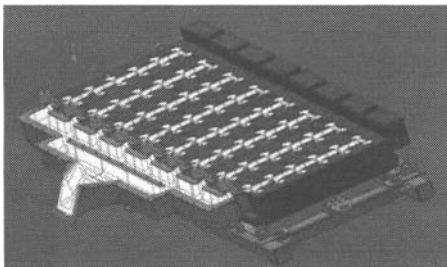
Casting table with casting section mounted on water-frame including metal distribution launder.
